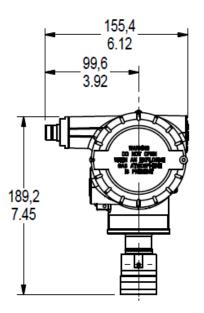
Typical mounting dimensions for STAW84L (remote antenna adaptor shown)
